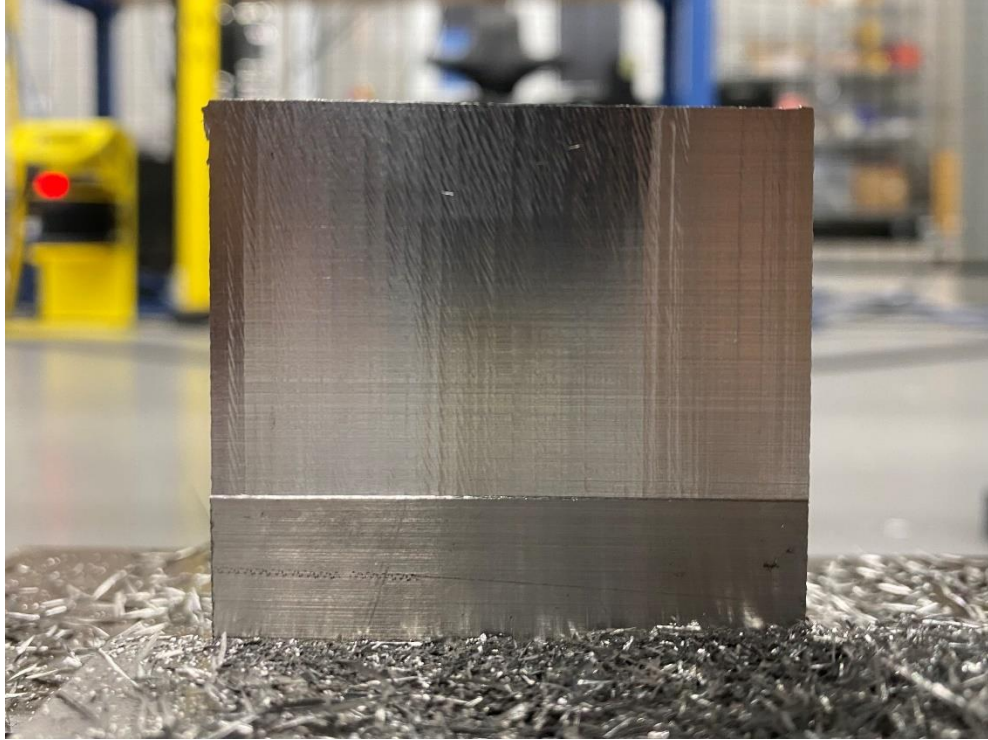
Workpiece after peripheral milling using a mechanical vise fixture
